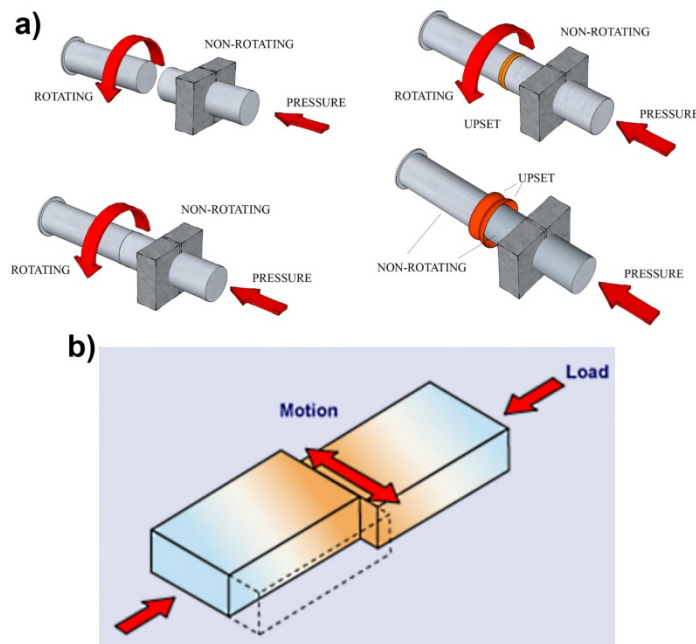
Rotational friction welding a) (Forward Precision Equipment Ltd, 2011) and linear Friction welding b) (Threadgill, 2008).
